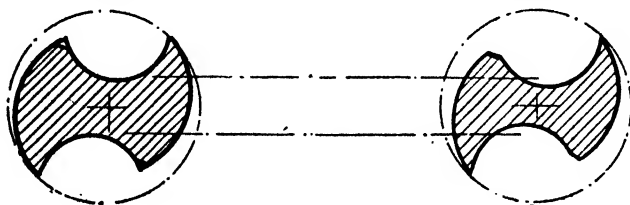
Dural Cutter on the left; Alum. and Alclad Cutter at right.
